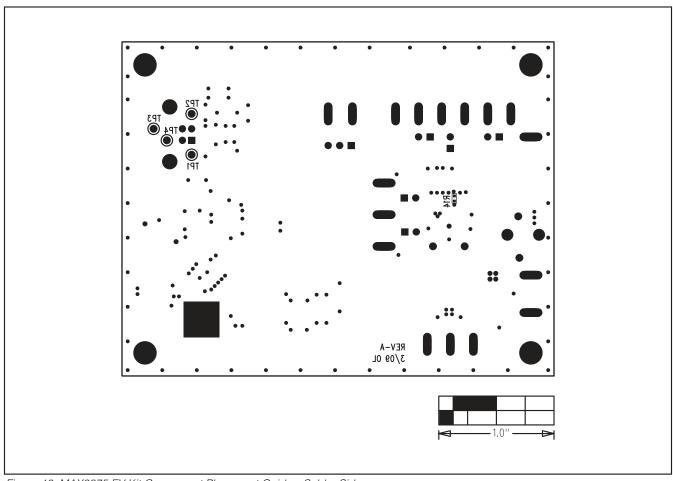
MAX9875 EV Kit Component Placement Guide—Solder Side
